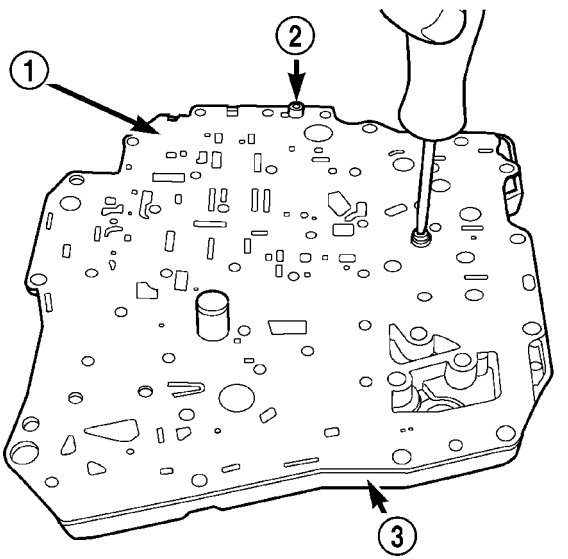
Install Separator Plate-to-Transfer Plate Screws
